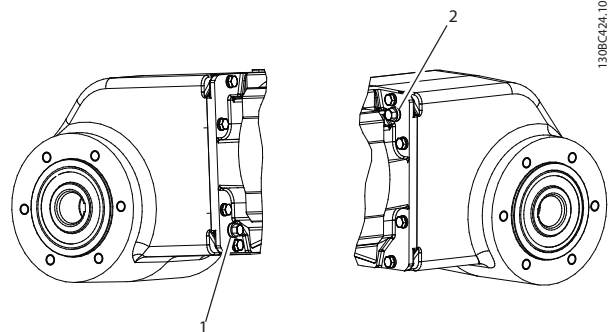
VLT® OneGearDrive Oil Screws 1 and 2
